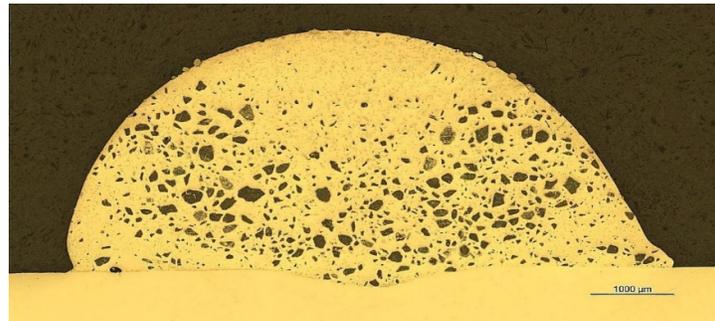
Backhand welded bead with 15° angle. Lack of FTC on top. Etched with Murakami.
